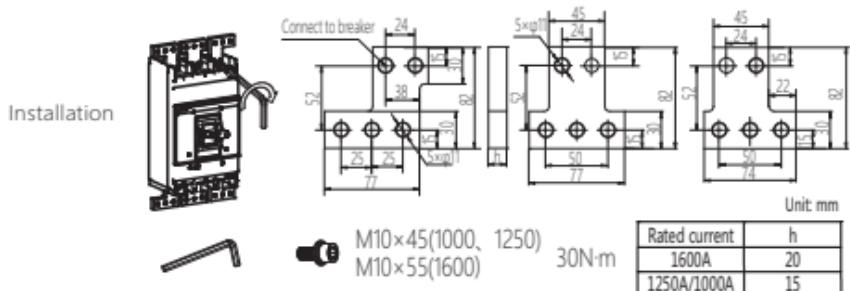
NXM-1250/ NXM-1600 connecting plate and wiring dimension
